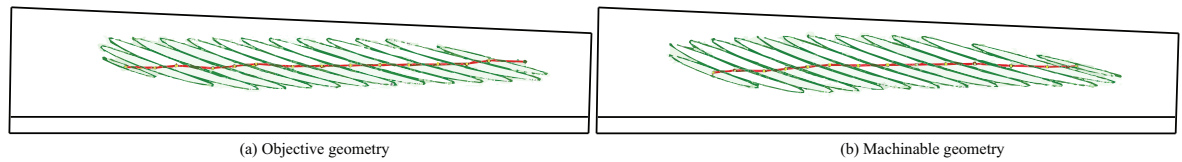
Contact pattern on the concave side of the pinion tooth surfaces - CASE 2.
